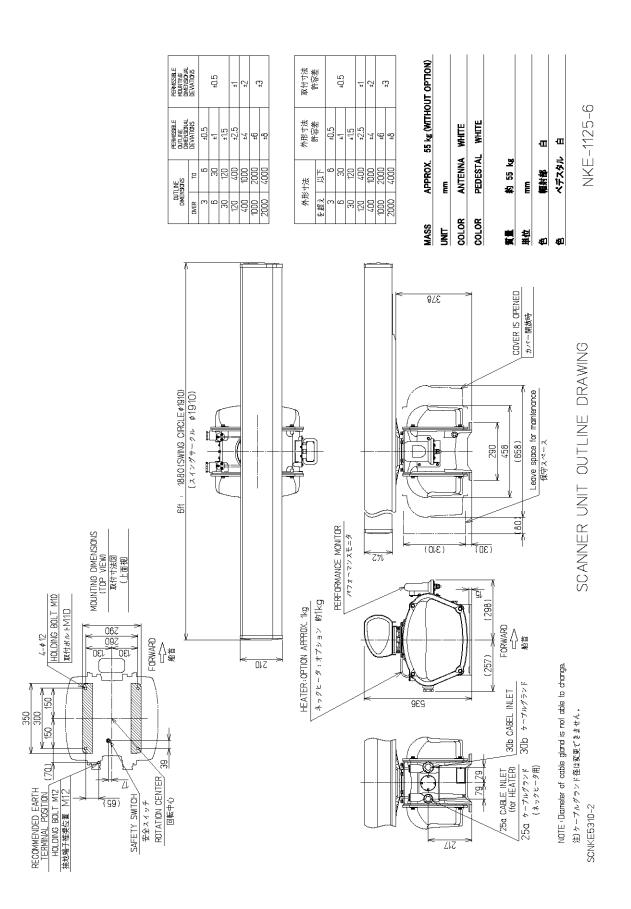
Outline Drawing of Scanner Unit, Type NKE-1125-6
